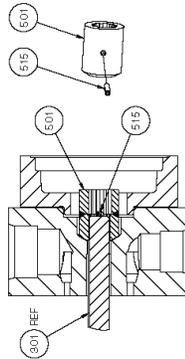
Exploded parts drawing, PVWJ-011/-014/-022 A-Frame (520024-101 sheet 2 of 4).
